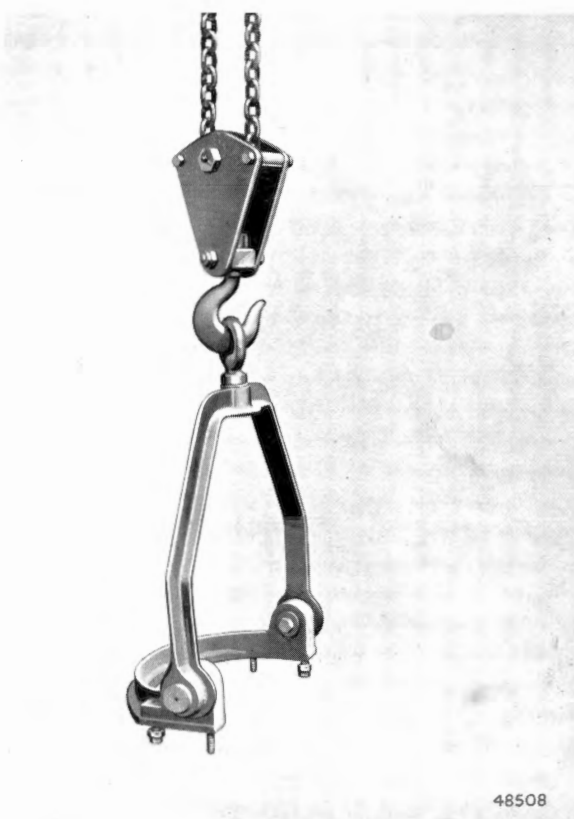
LIFTING DEVICE FOR FRONT COVER ASSEMBLY
